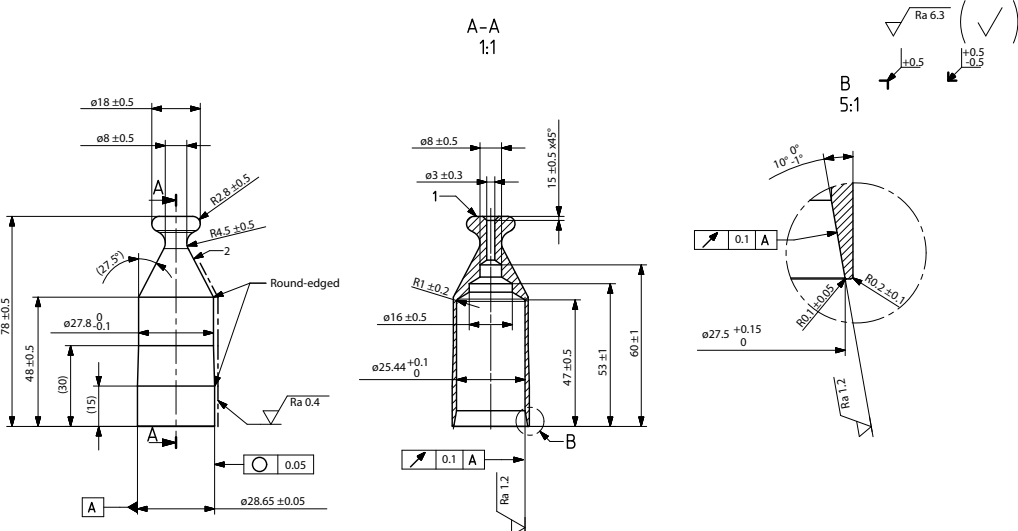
Torpedo for 25mm, 1 in., and 7/8 splined shaft
